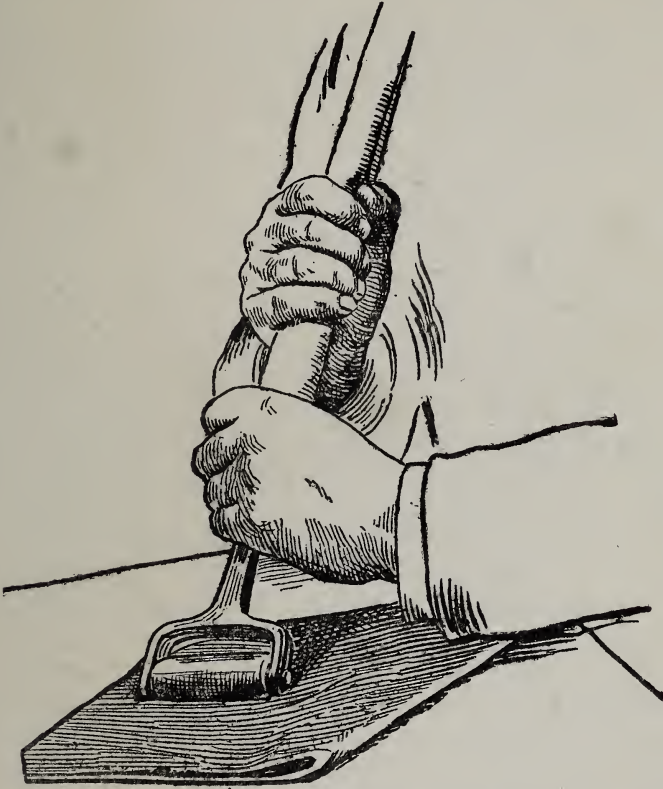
USING ROLLER TO SECURE ADHESION OF INLAY
